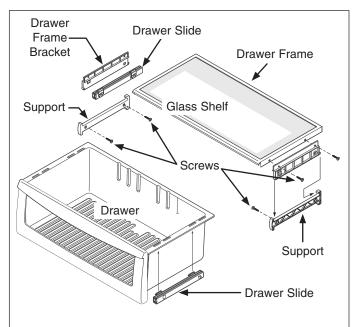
Glass Shelf and Wire Basket Assemblies Removal
